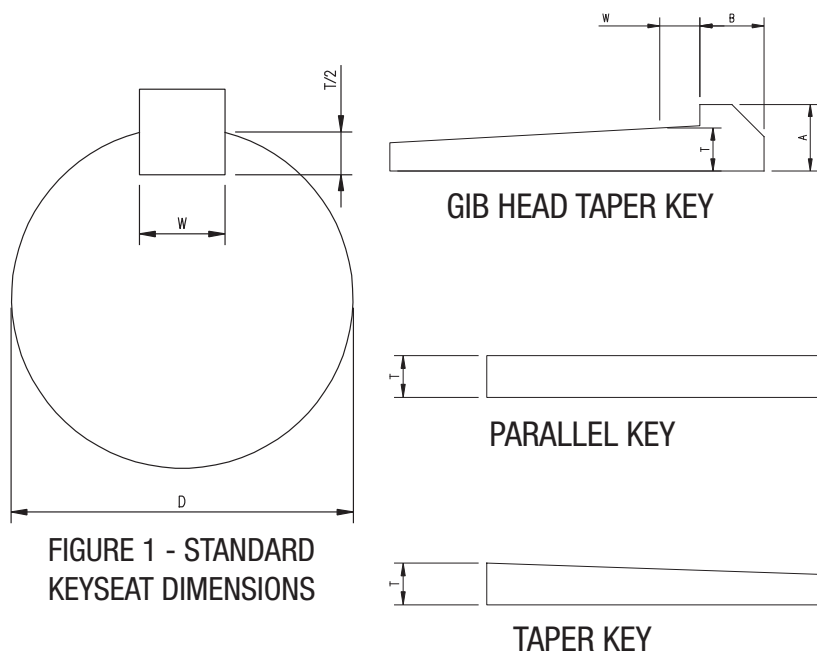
STANDARD KEYSEAT DIMENSIONS
